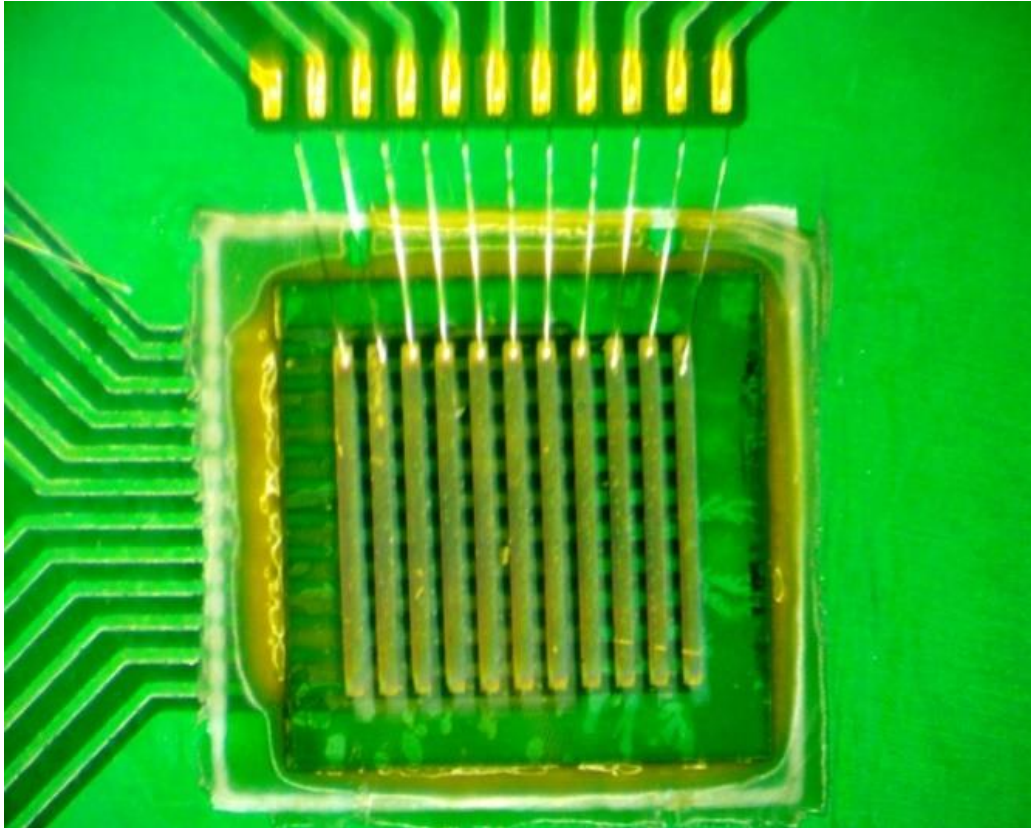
The sensor mounted to the PCB with ACF and wire bonding.
